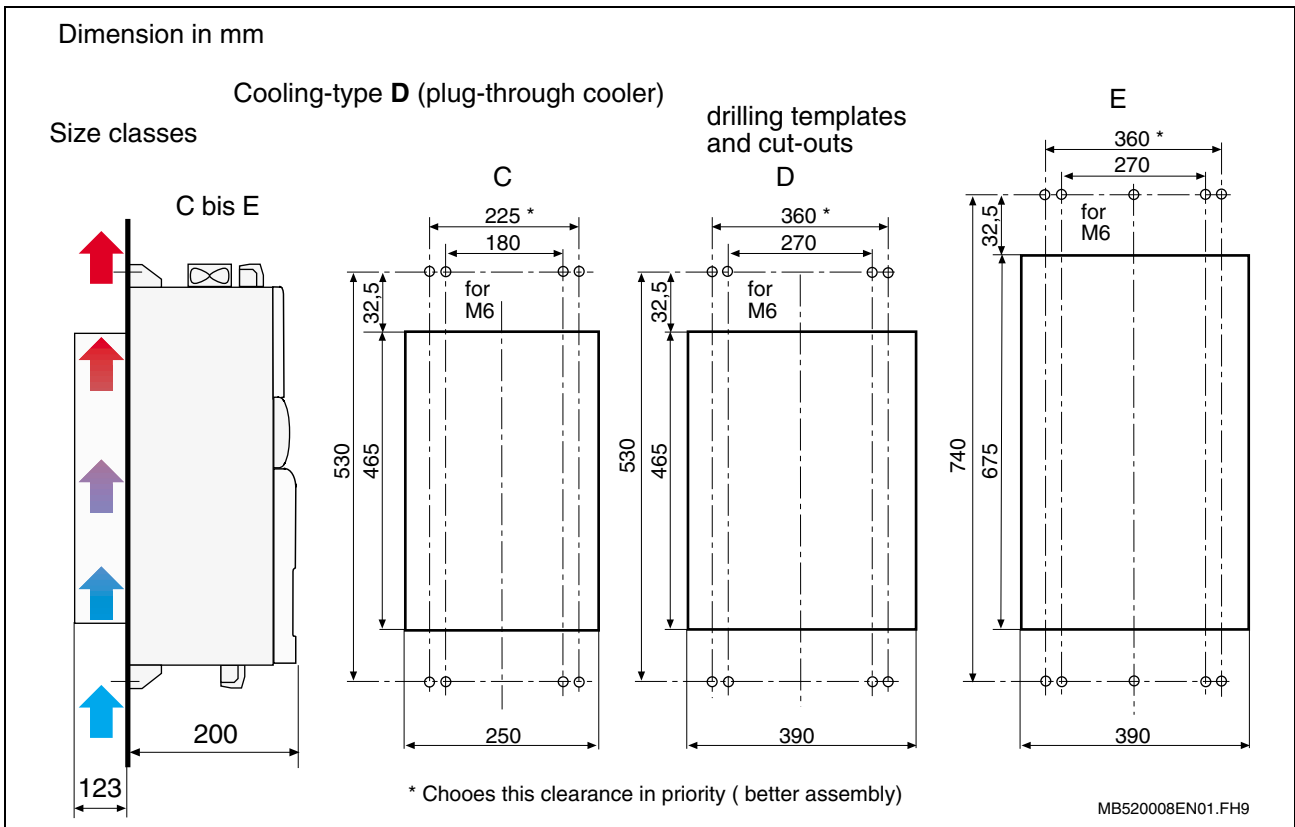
Dimension sheet for cooling type D, size classes C, D, E
